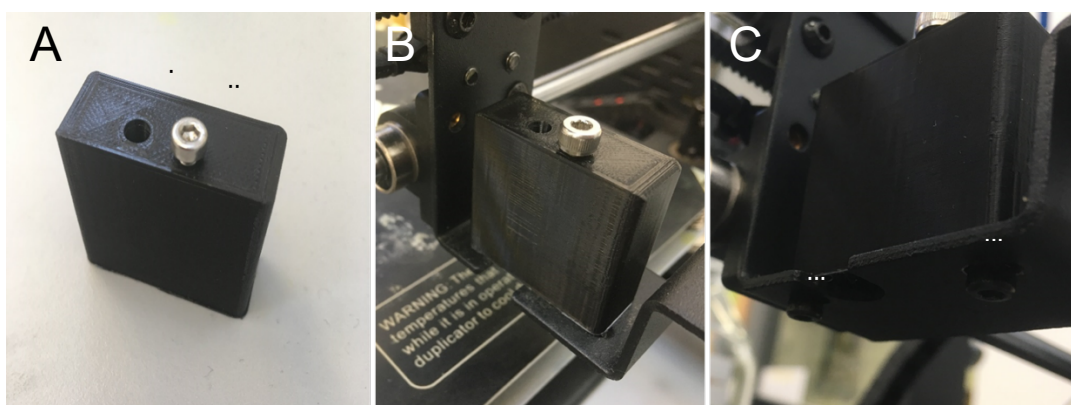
Outline of the printer set-up. (A) An M4 hex bolt was secured in the 3D printed nebuliser block. (B) The nebuliser block was then secured in place onto the empty extruder housing using (C) the M3 hex bolts on the underside of the 3D printed block.
